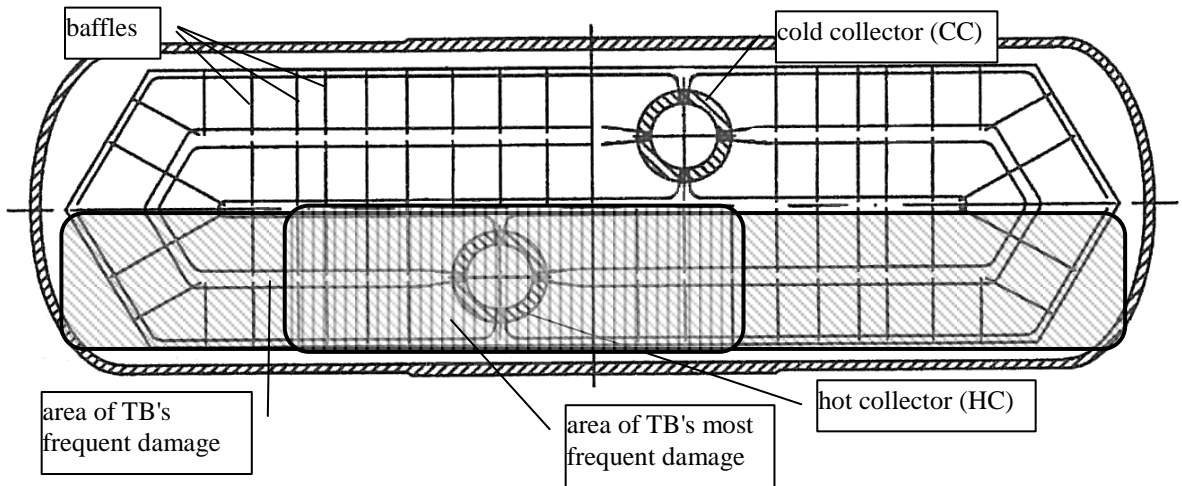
WWER STEAM GENERATOR TUBE BUNDLE FREQUENT DAMAGE LOCATIONS
